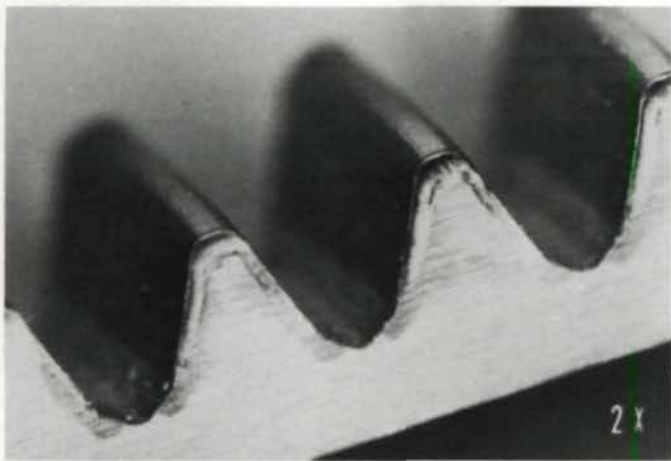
15 DP hob illustrating catastrophic tooth failure due to excessive cratering caused by hobbing too many linear inches.
